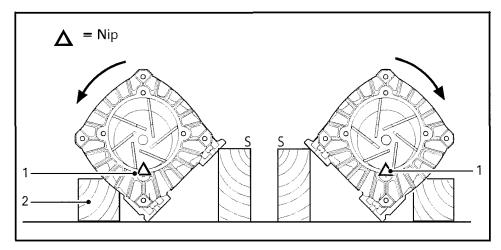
Supporting the machine using wooden blocks. (sideplates removed for clarity).
